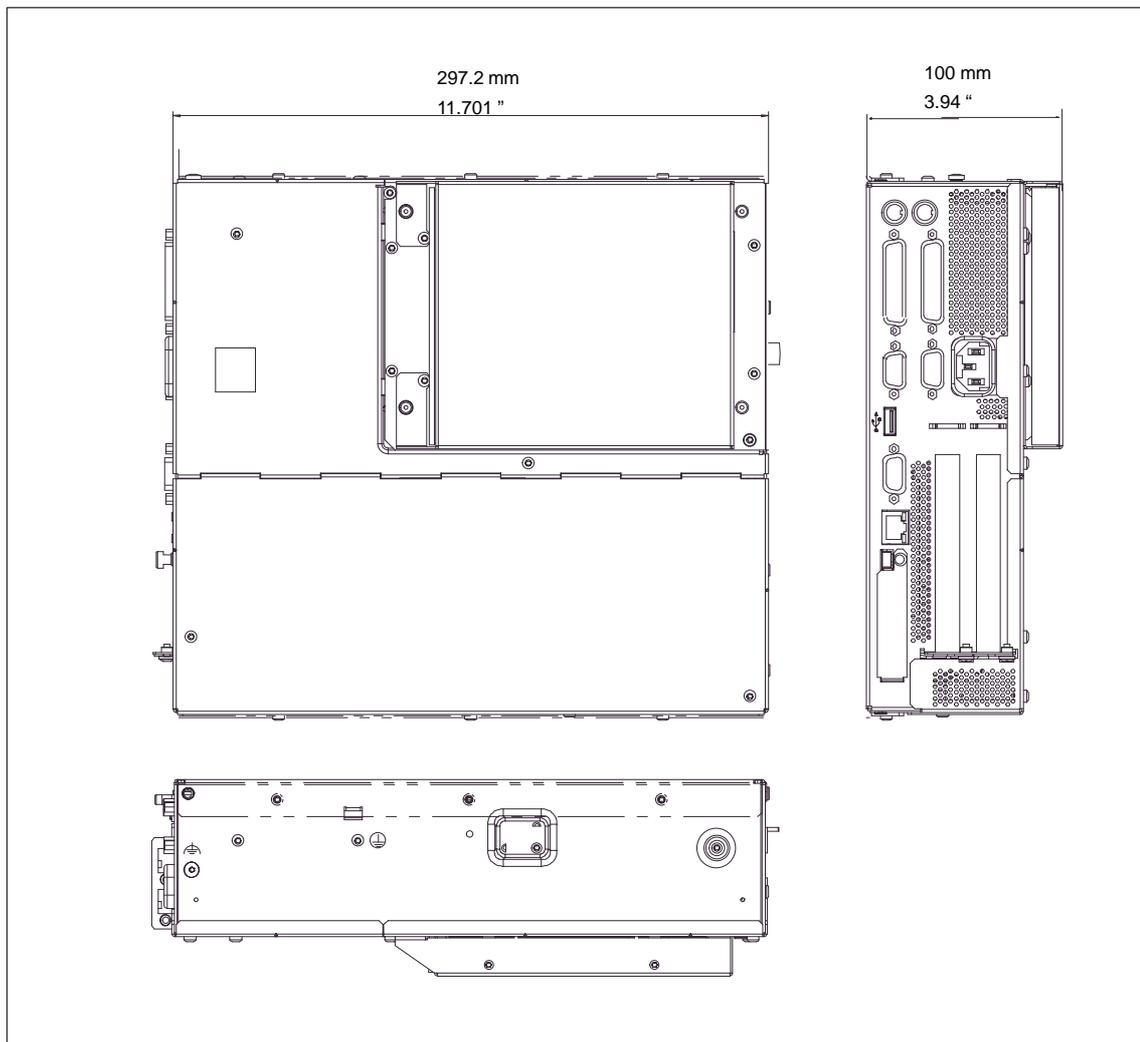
Dimension Drawings for Installing in Panel (Device with CD-ROM Drive)
